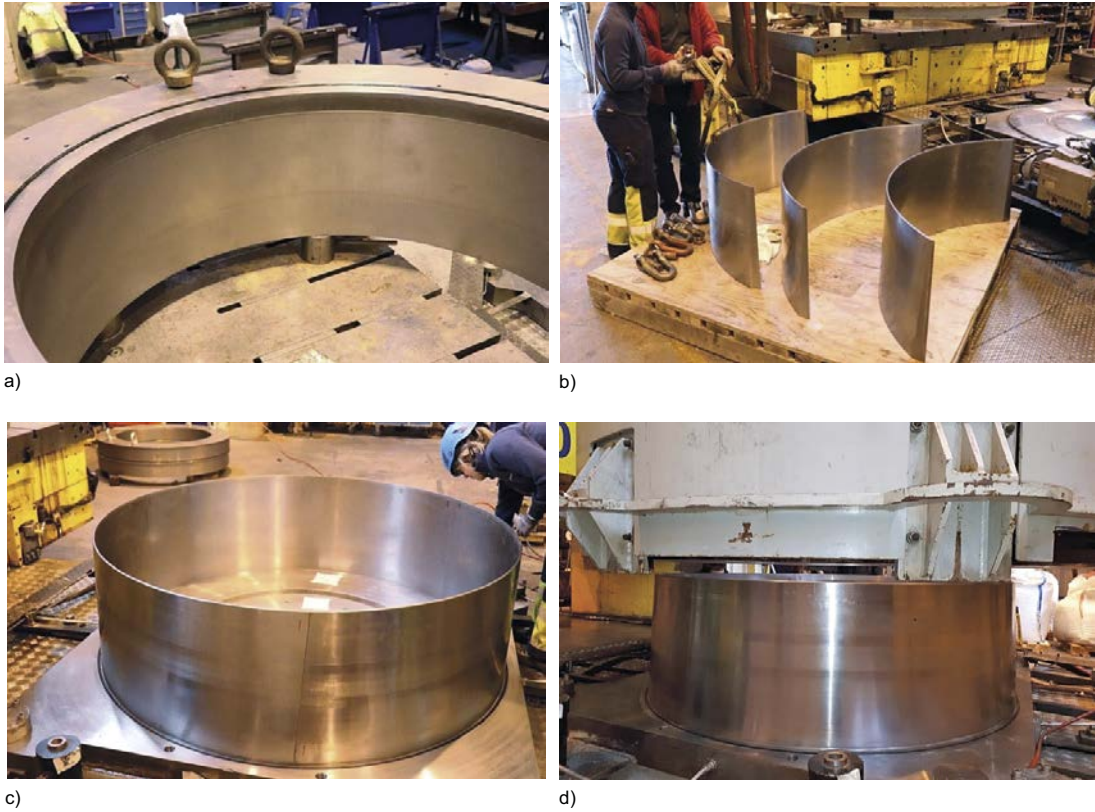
The preparation of the mould before starting of the compaction, a) the ring shaped part of the mould, b) the three parts of the liner, c) the cylindrical liner mounted together and d) the ring placed over the liner.
